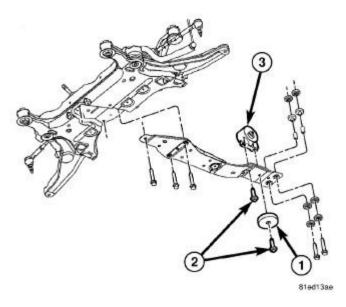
Front Mount Vertical Bolts Courtesy of CHRYSLER LLC
